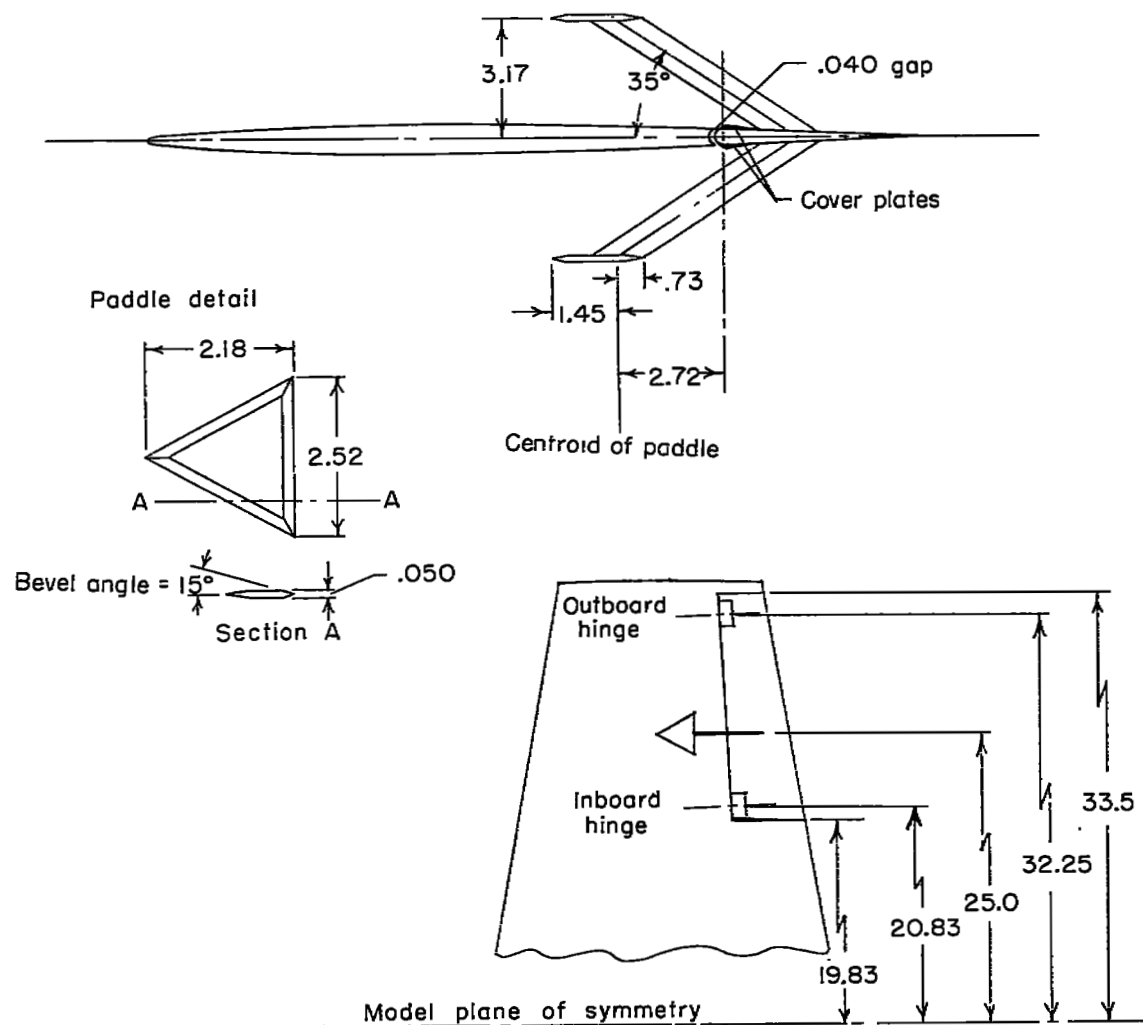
Aileron and paddle balance details. All dimensions are in inches.
